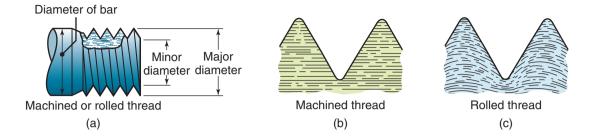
(a) Features of a machined or rolled thread. Grain flow in (b) machined and (c) rolled threads. Unlike machining, which cuts through the grains of the metal, the rolling of threads imparts improved strength because of cold working and favorable grain flow.
